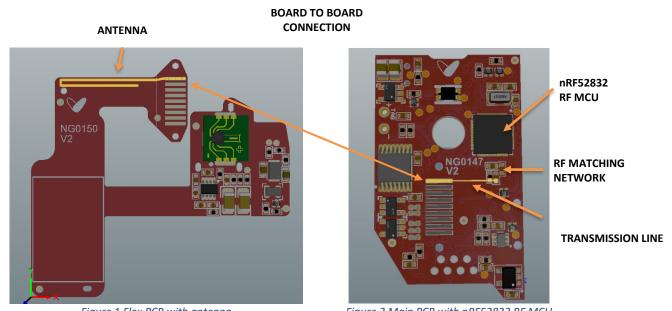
Flex PCB with antenna Figure 2 Main PCB with nRF52832 RF MCU
